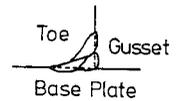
Section of Weld-toe at End of Gussets(Ref.12)
